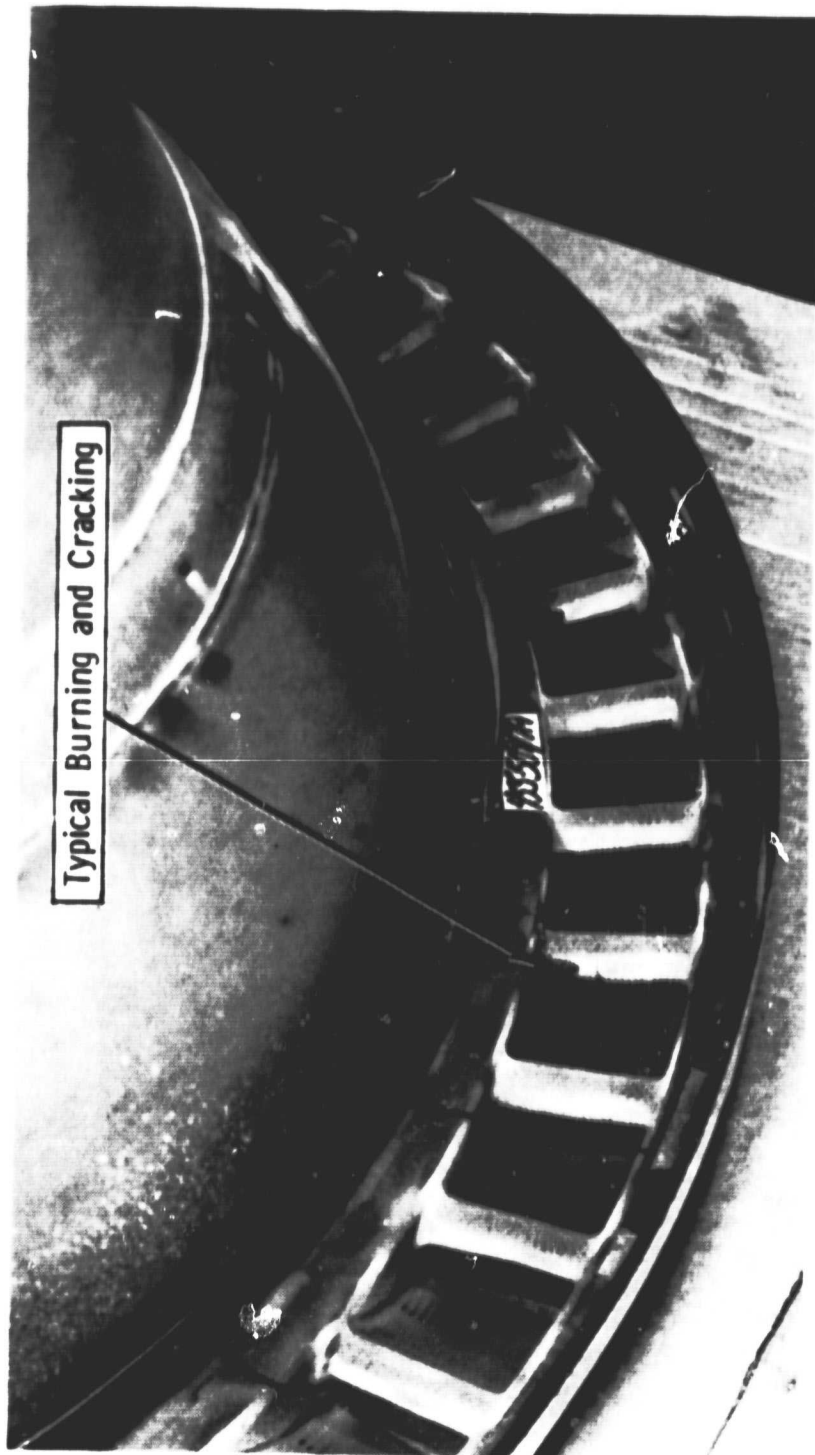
Front View of Stage 1 Nozzles Showing Inner Platform Burning and Cracking.
